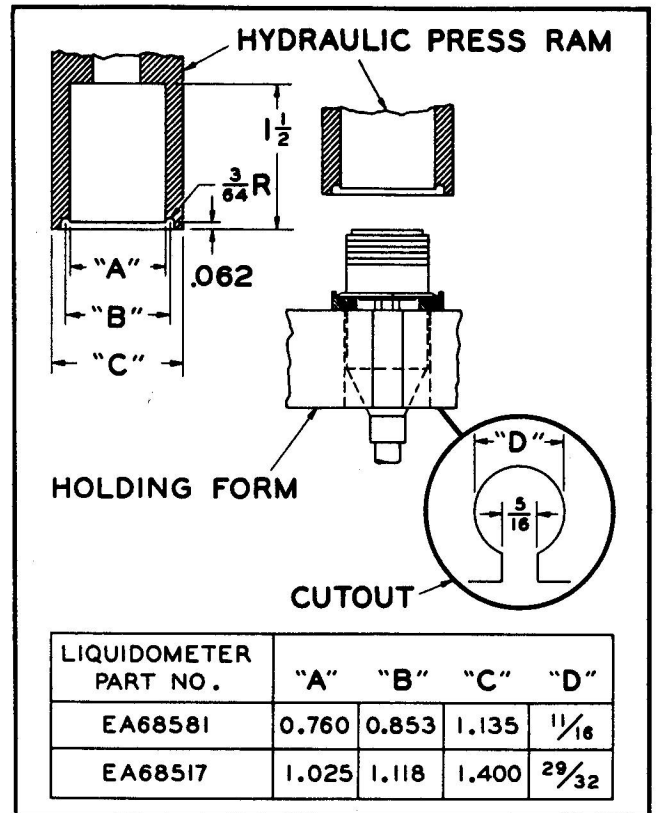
C. Attaching Receptacle to Conduit Assembly
